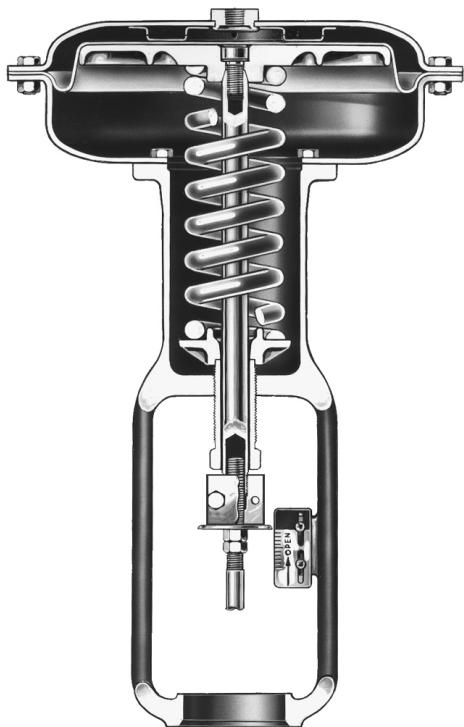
Cross-section of an air-to-close valve actuator. Courtesy of
